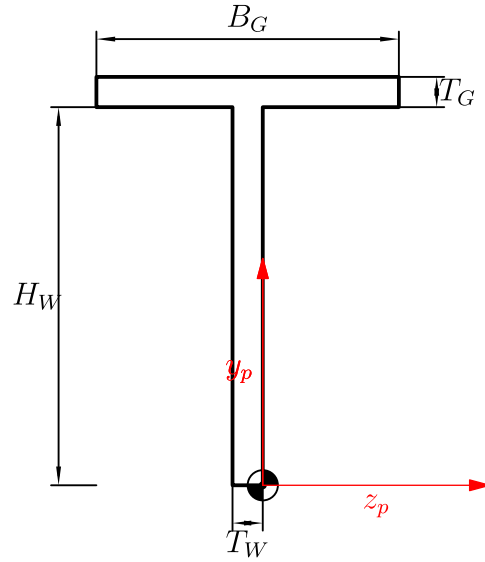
T: Cross section dimensions in a Poseidon T profile section.
